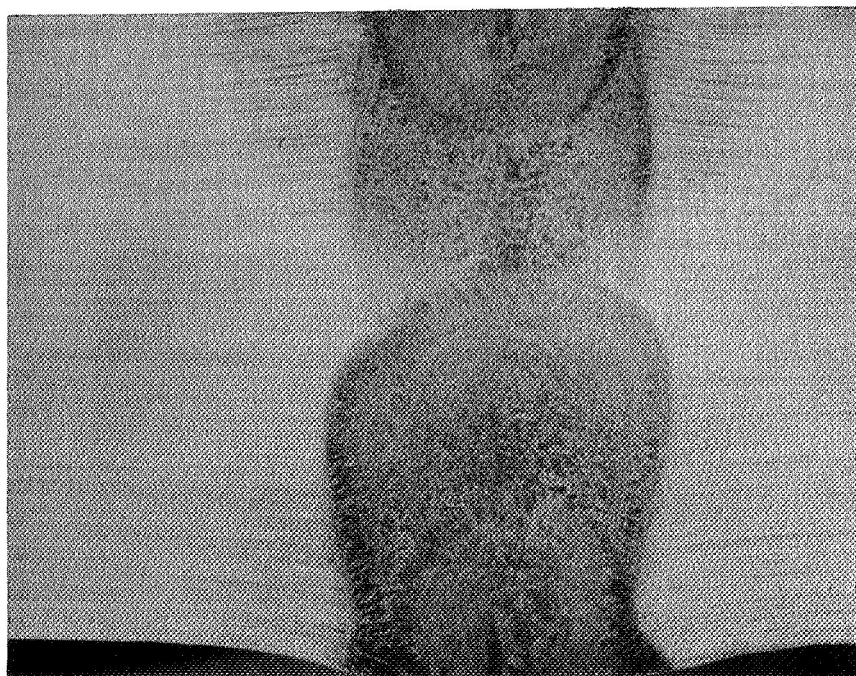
Macrosection of an X7007-T6 Welded Joint (Enlarged 3X)
